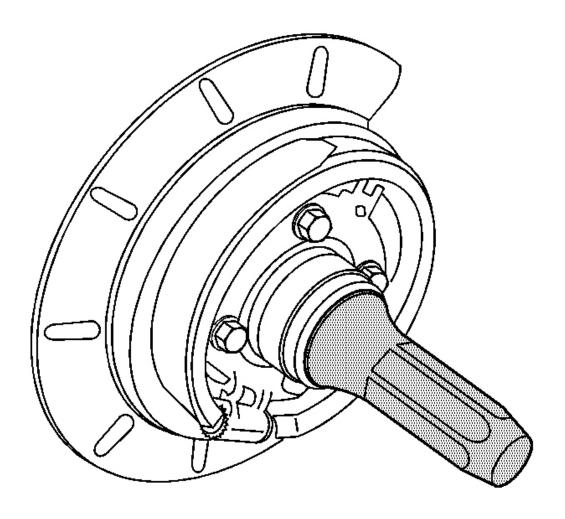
View Of Axle Shaft Seal & J 21128 Courtesy of GENERAL MOTORS CORP.
